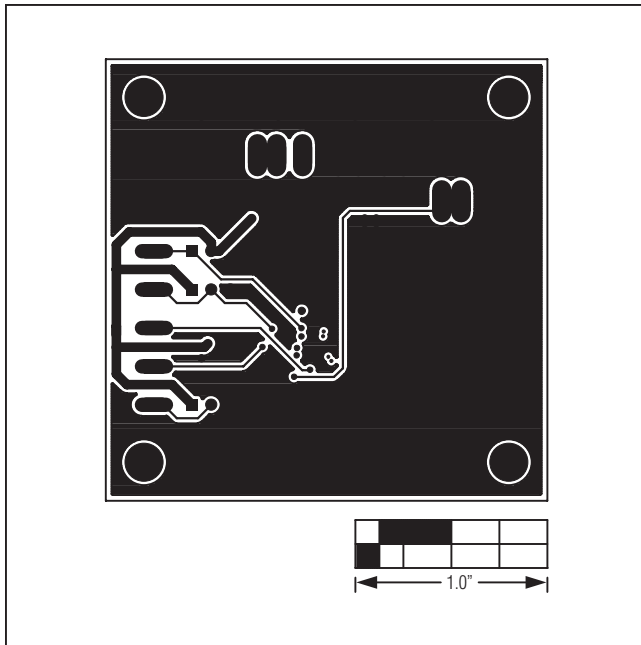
MAX15109 EV Kit PCB Layout—Inner Layer 3
